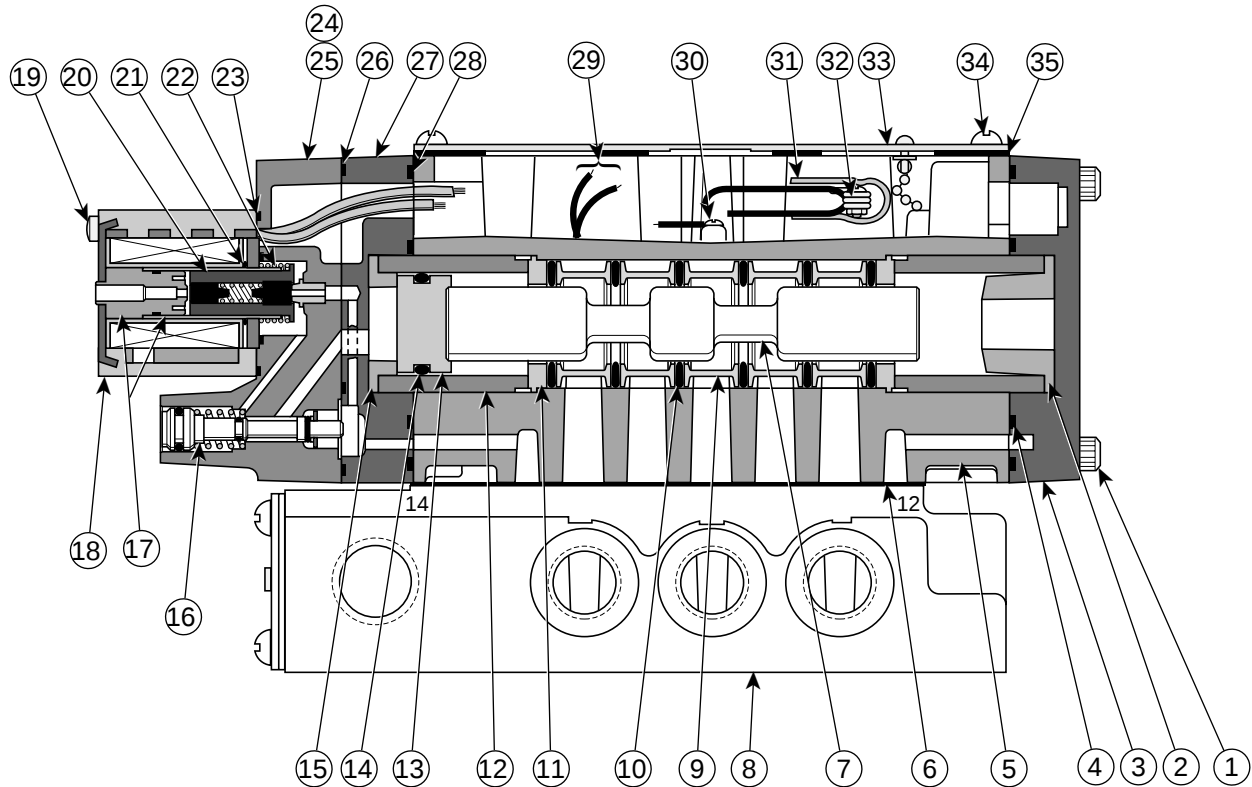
Single Solenoid Operator - air return (plunger type solenoid)
